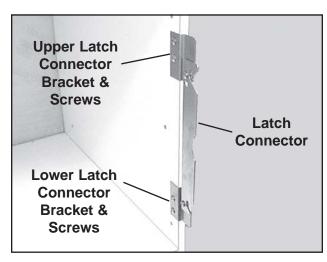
Latch Connector & Bracket Assembly (mounted on right)
